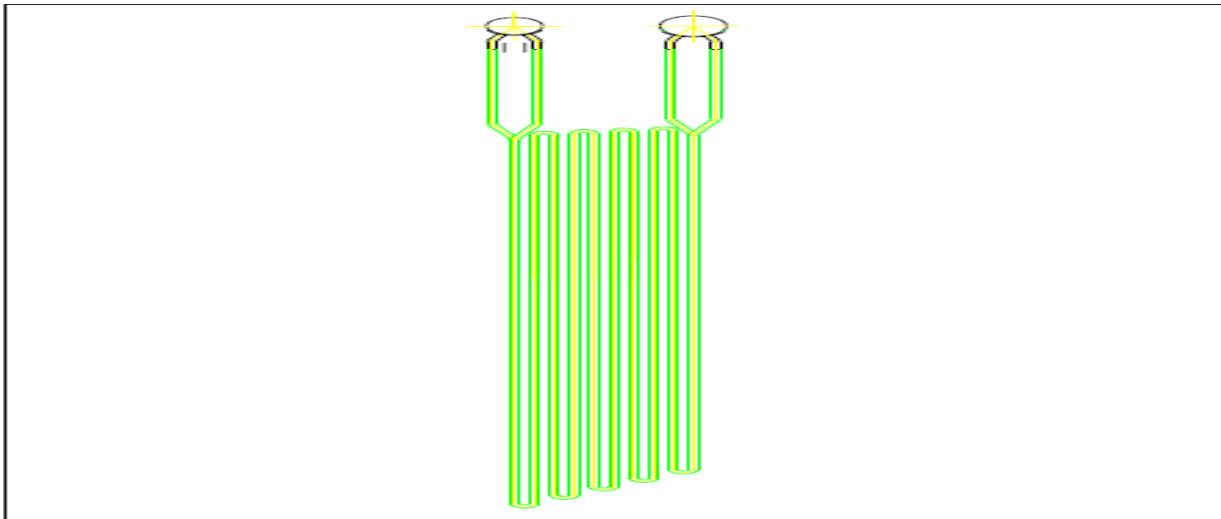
Two Dimensional Auto CAD Super Heater Drawing.
